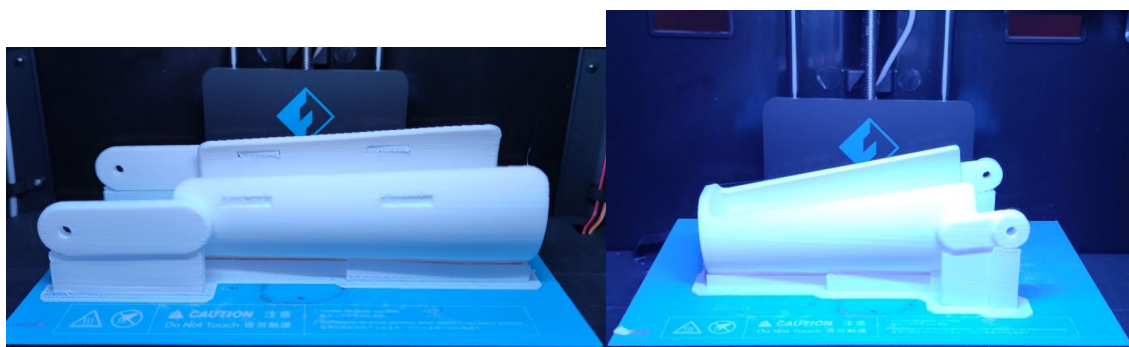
Parts of prosthesis (socket and forearm) made using FlashForge Creator Pro machines
